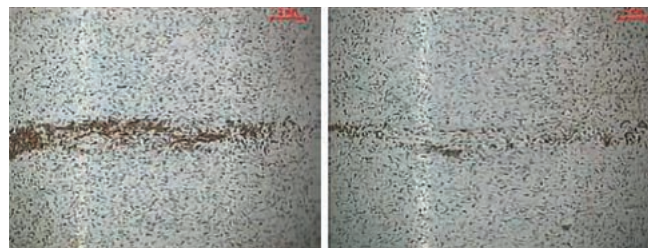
Damage due to erosion in the running-in layer of a P1 plain bearing
